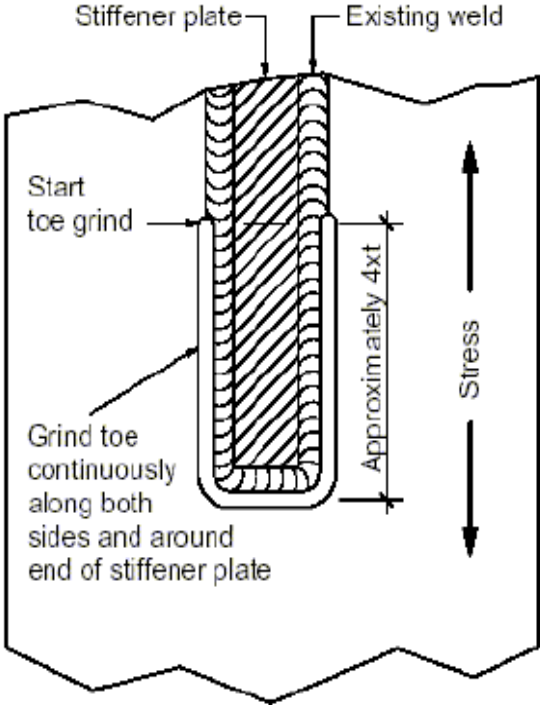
Recommendation for burr grinding weld toe technique (Haagensen and Maddox 2006).
